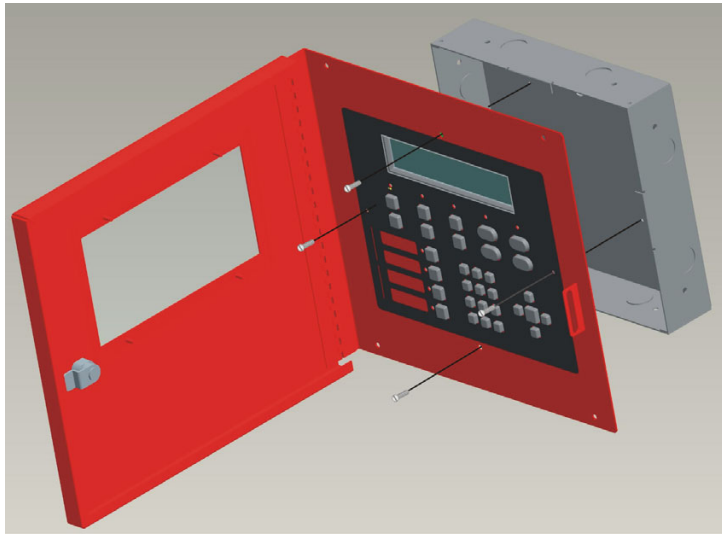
Attaching Annunciator / Door Assembly to Backbox
